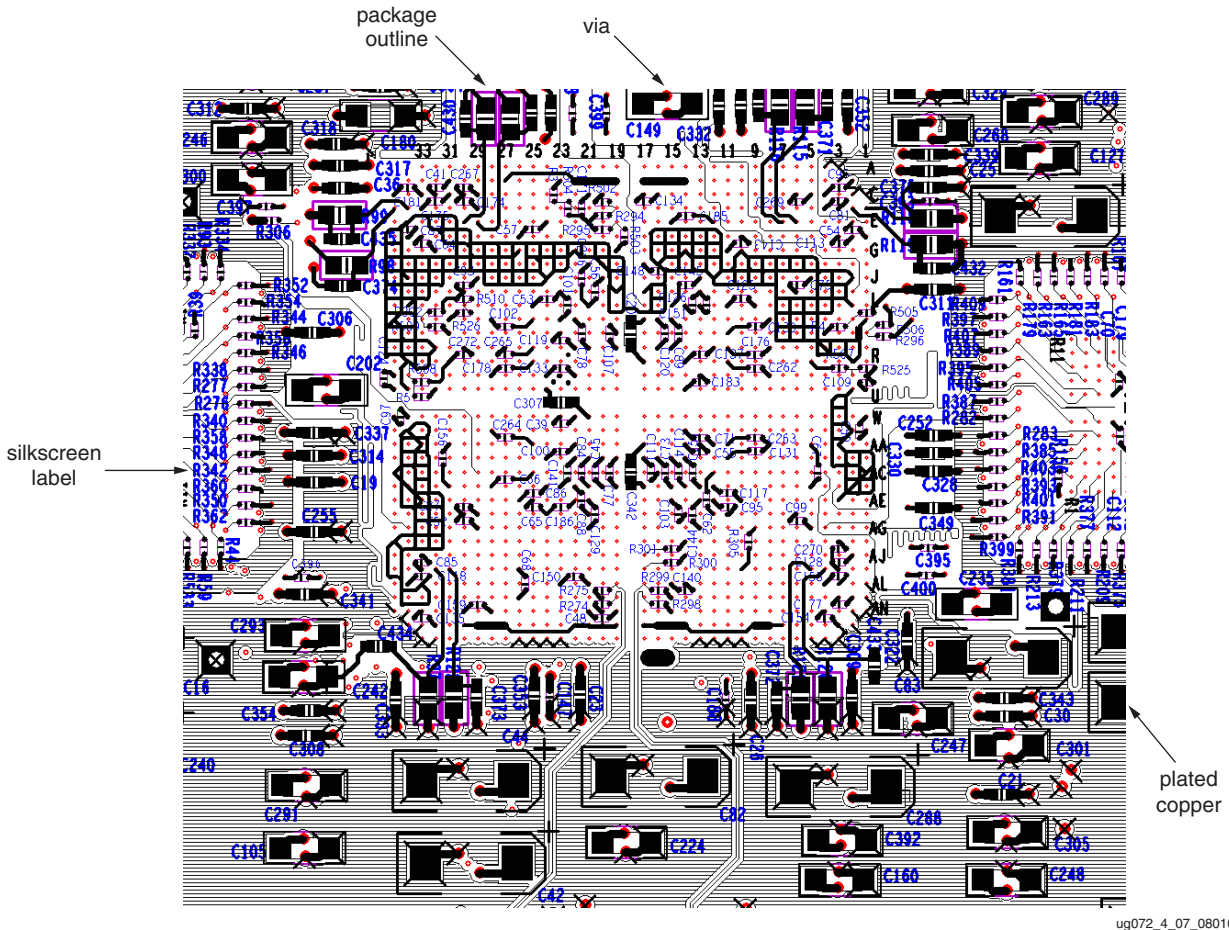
Example PCB Layout Showing Capacitor Placement on the Bottom Surface
